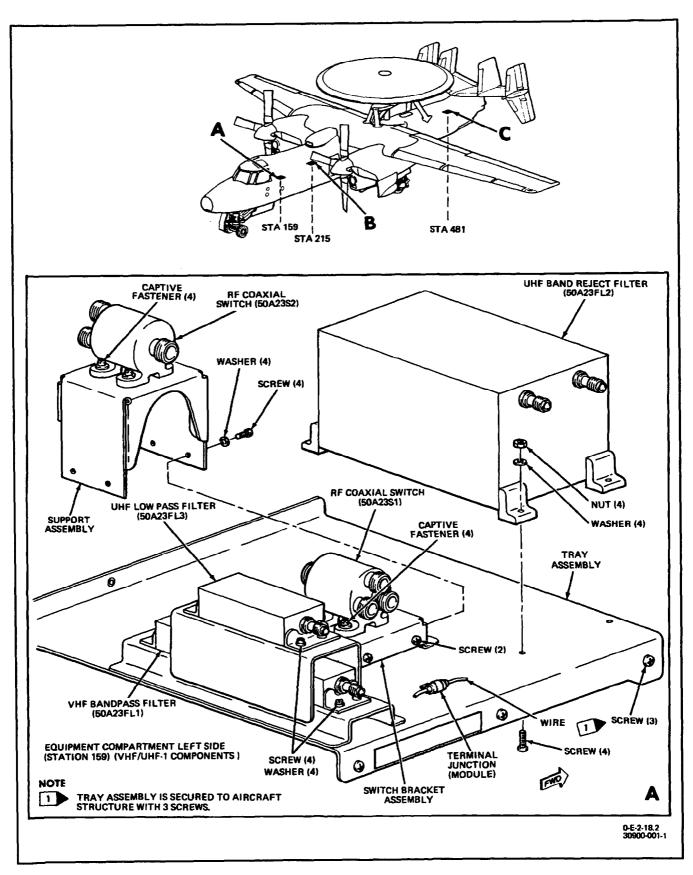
Removal and Installation of Switch and Filters Associated With Radio Set (Sheet 1 of 3)
